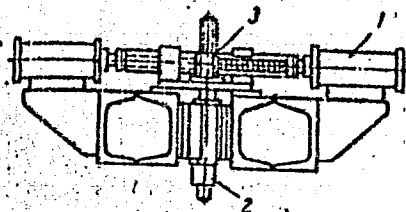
1--drive cylinder rods; 2--electrode holders; 3--driven gears (nuts)
